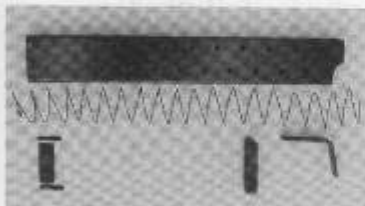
The magazine disassembled. The spring, follower, stop, base plate, and pins are shown in their respective positions.
